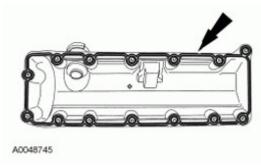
Identifying Adhesive Applying Area Around Gasket Courtesy of FORD MOTOR CO.
